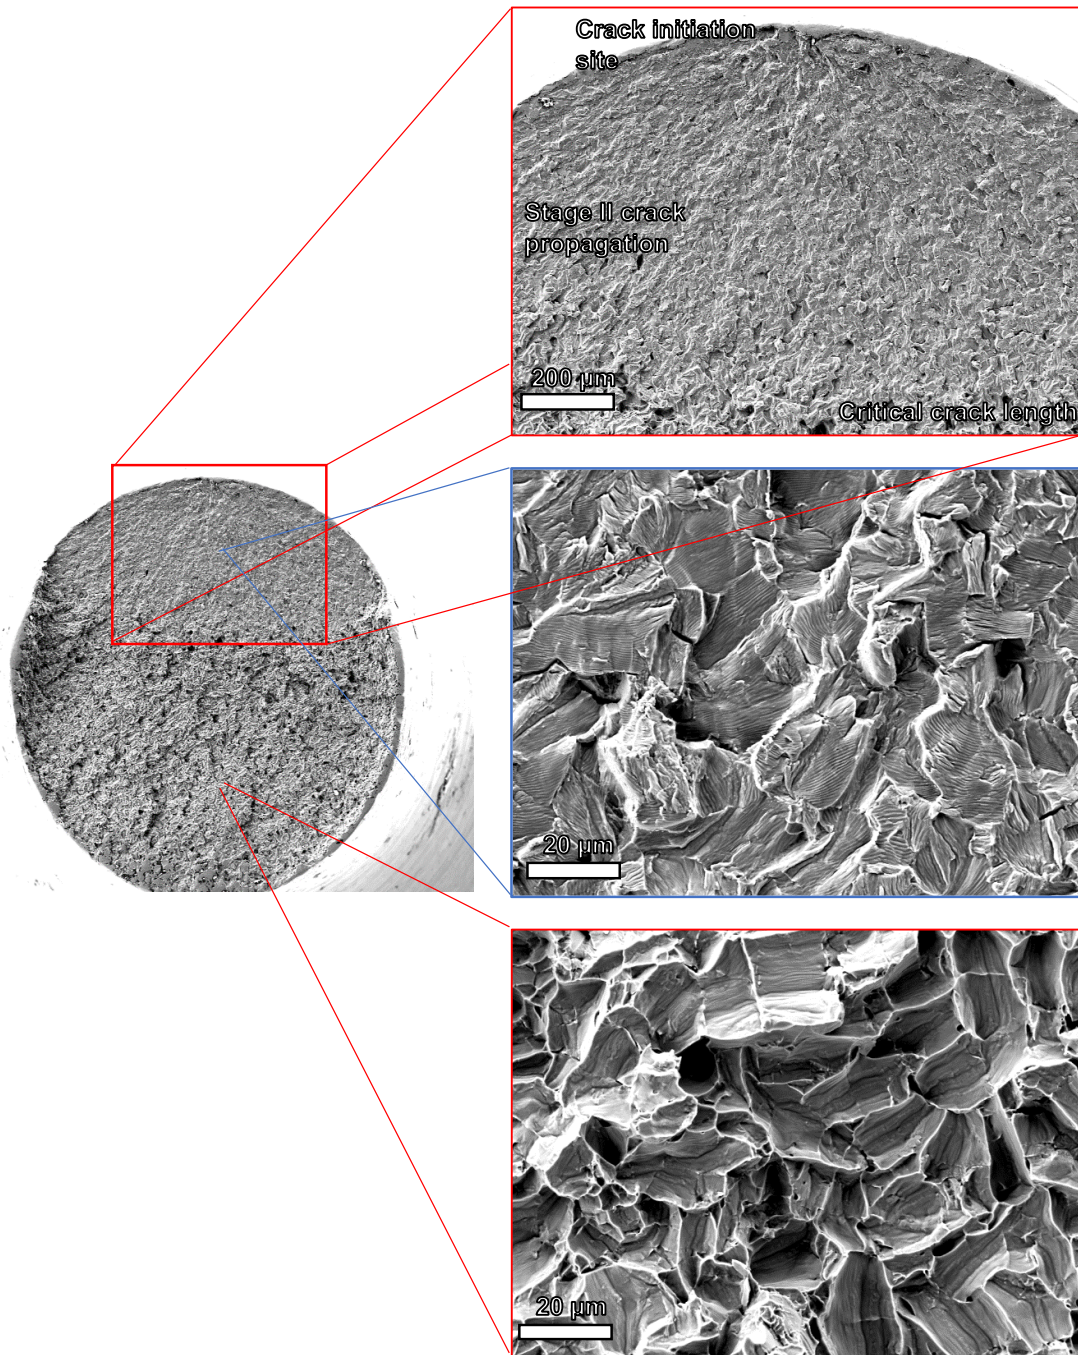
Secondary electron images of a fractured fatigue specimen, tested at 850 MPa manufactured in CP-Ti and without laser marking. The left side shows an overview image of the fractured surface, and the right side shows magnified areas in the crack initiation-, crack propagation- and fast fracture zones.
